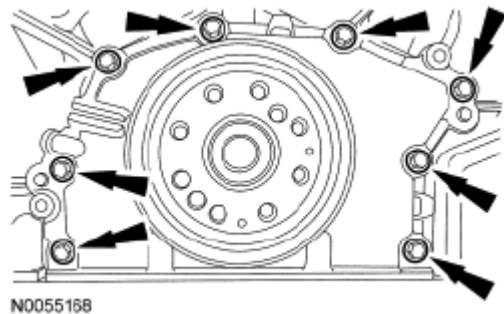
Locating Crankshaft Rear Seal Retainer Bolts
